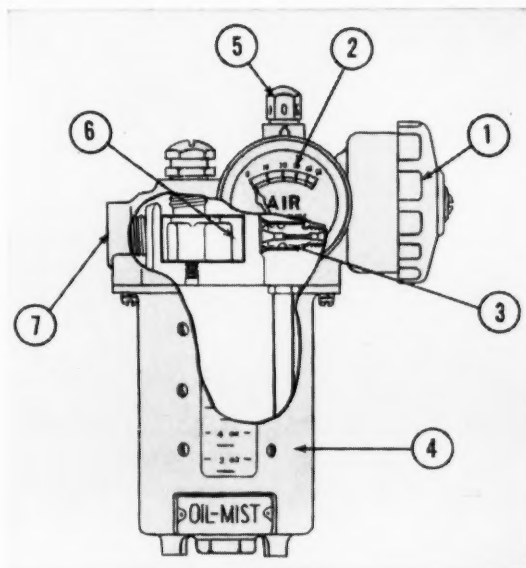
shows a picture of this lubricator connected to an air filter and regulator.
